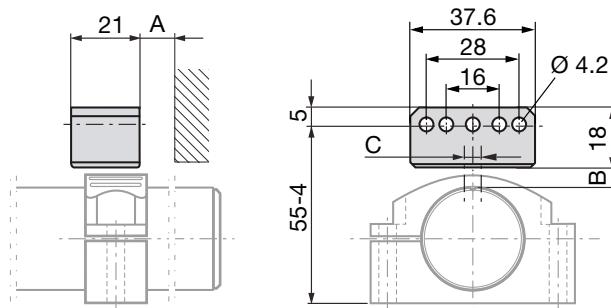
Dimensions and spacing with magnet BTL6-A-3801-2
